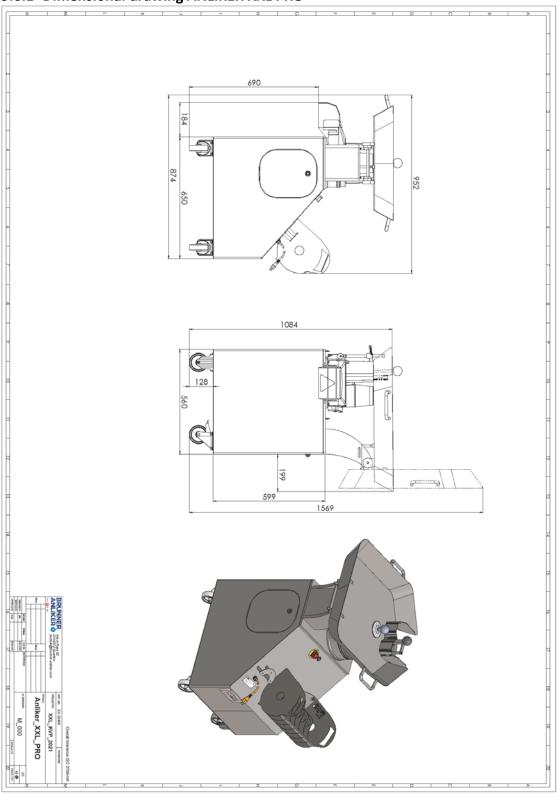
Dimensional drawing ANLIKER XXL PRO
